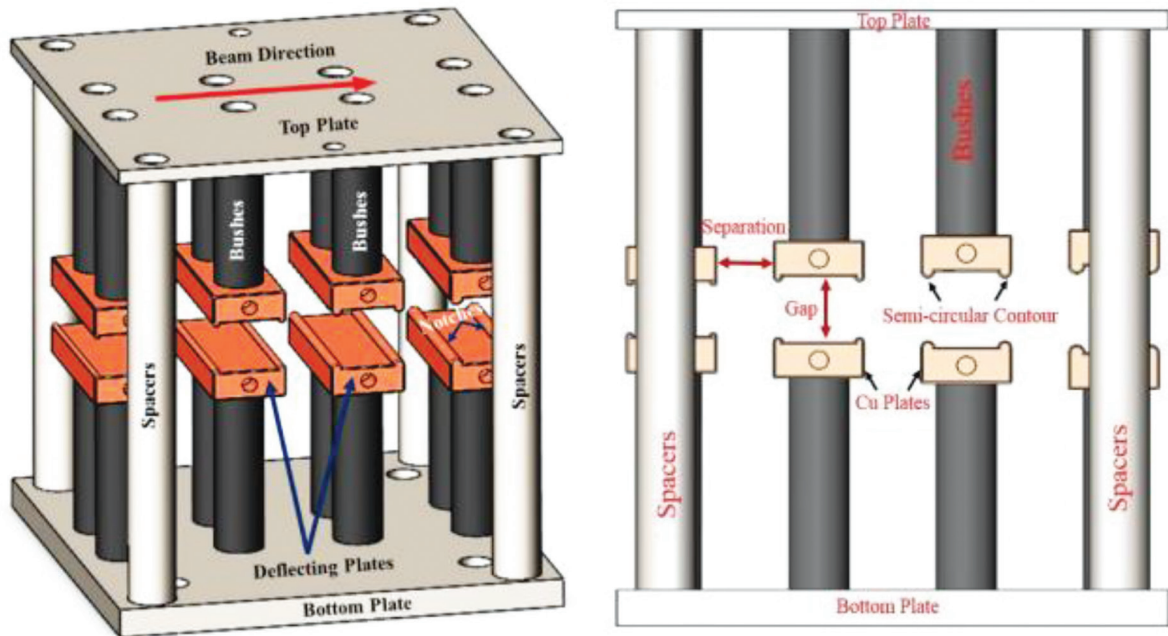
The inner mechanical assembly of TWC, (a) trimetric view, (b) side view
